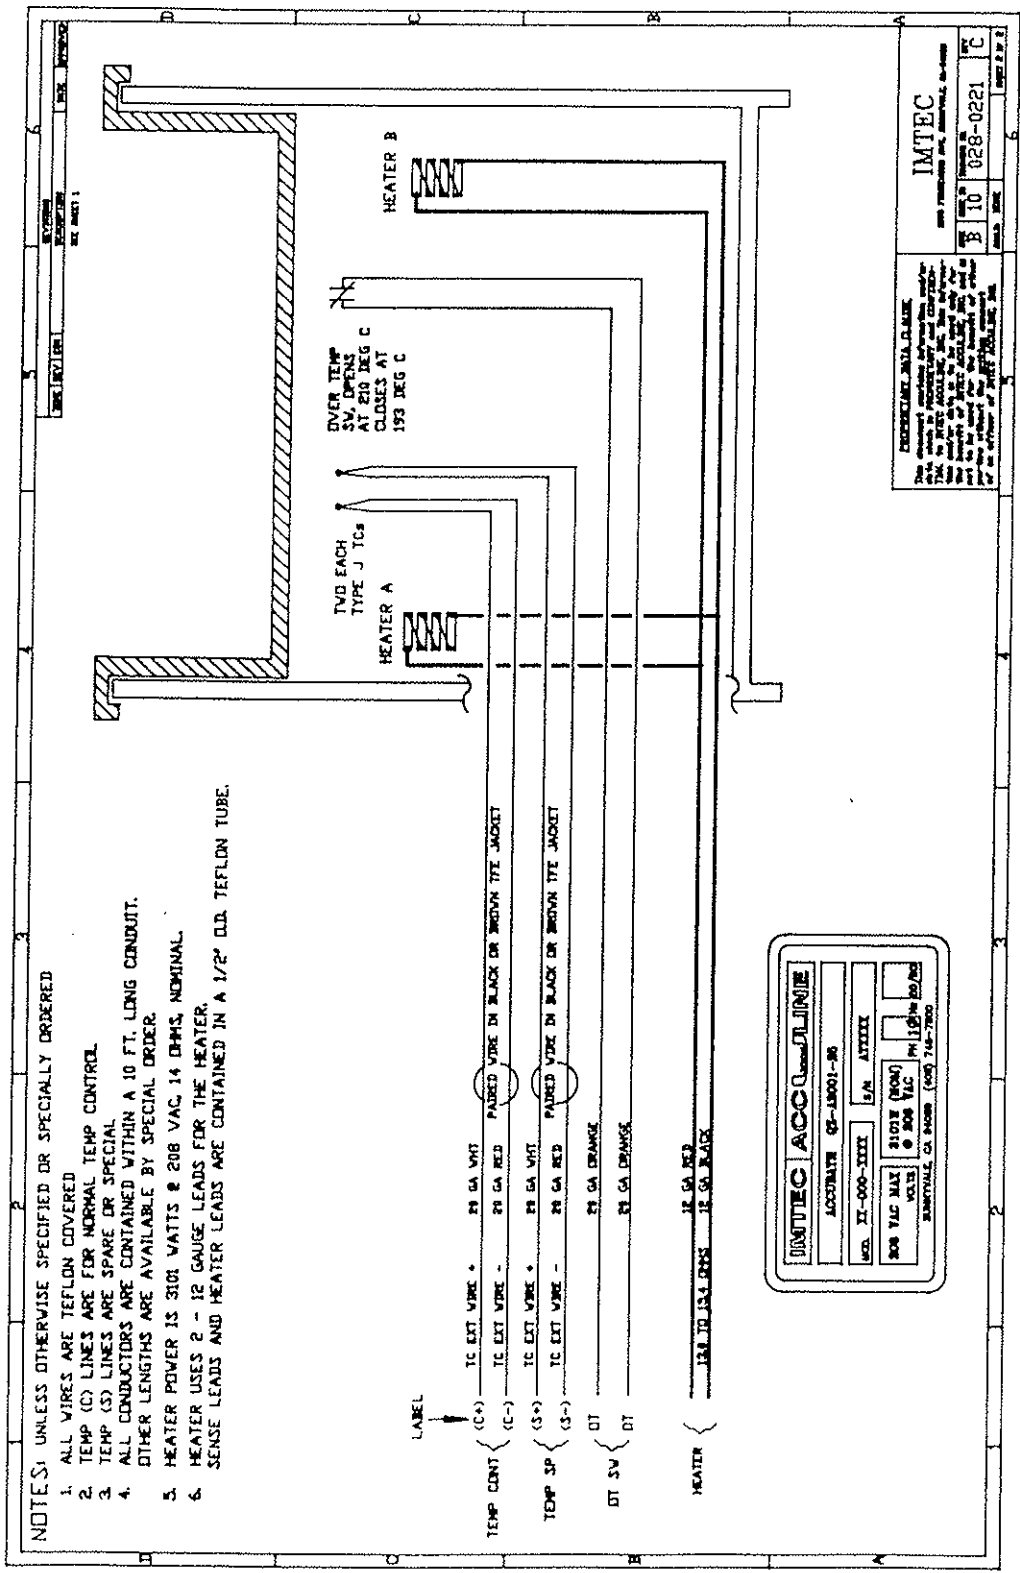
Typical Wiring Diagram, Bath with Multiple Pairs of Heater Cables
